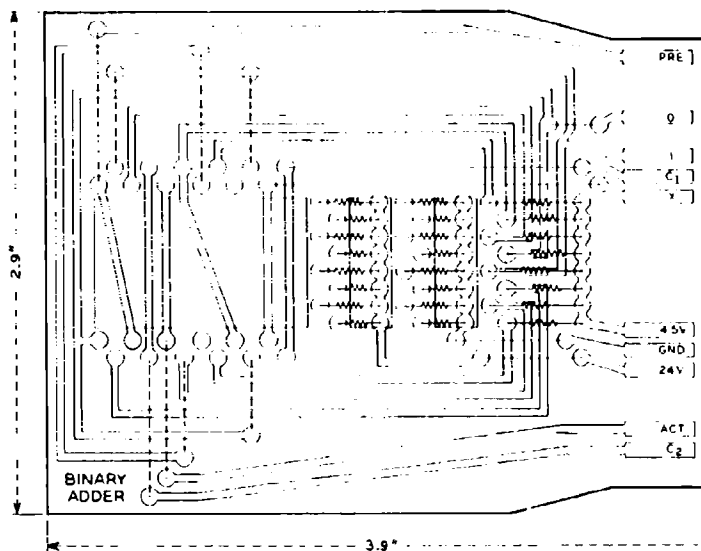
Layout plan of binary adder on printed-wire board using multiple device packages.
